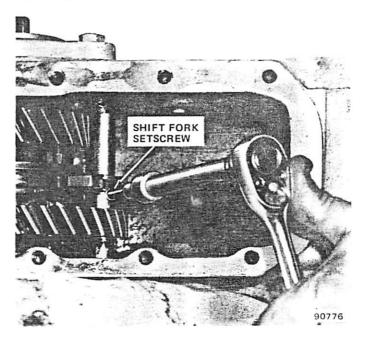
D-78 Shift Fork Setscrew Removal/Installation
